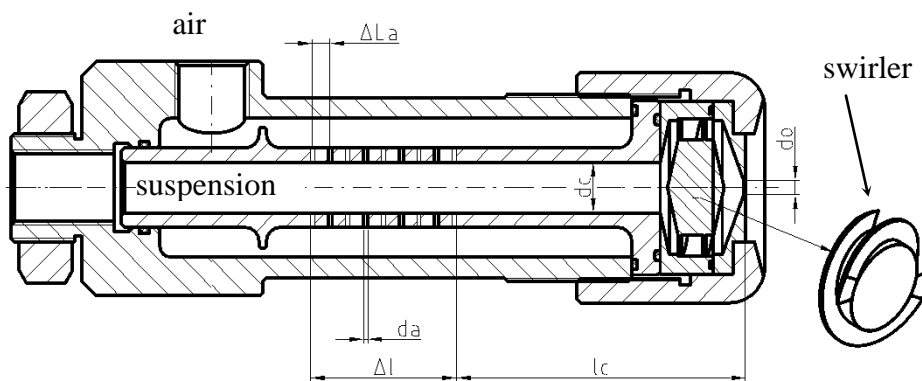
Schematic layout of the atomizer (I, II) with basic dimensions.
